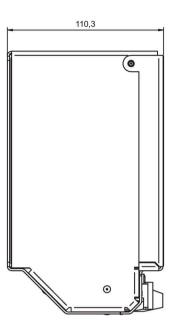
Dimension drawing 6EP4134-0GB00-0AY0
